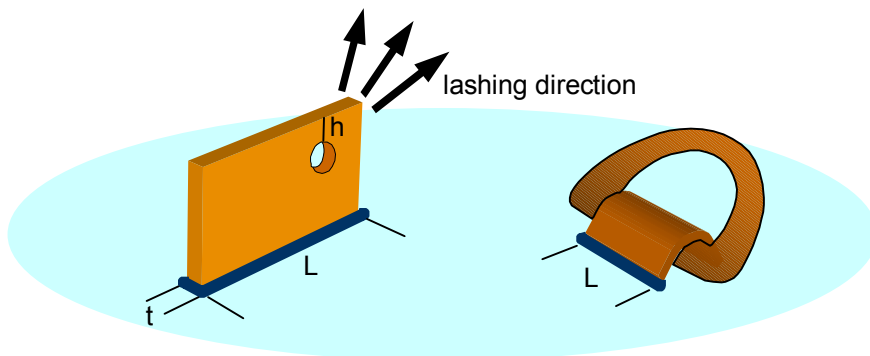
Welding a lashing plate (left) and a D-ring (right)
